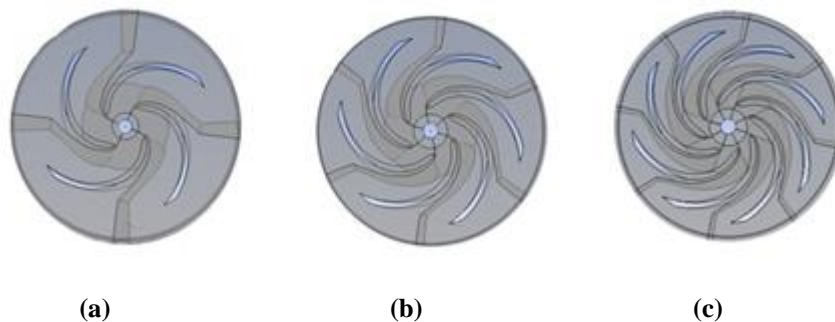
Impellers with different number of blades, (a) blade no:4, (b) blade no:6, (c) blade no:8
